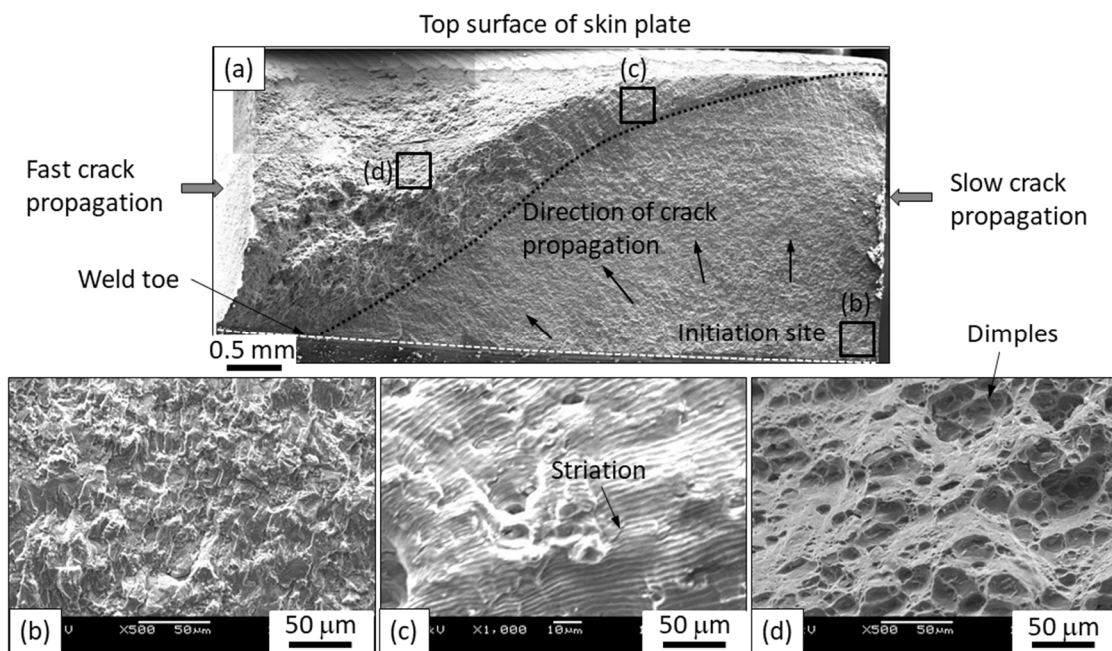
Fracture morphology of specimen cracked at weld toe under skin fatigue test.
